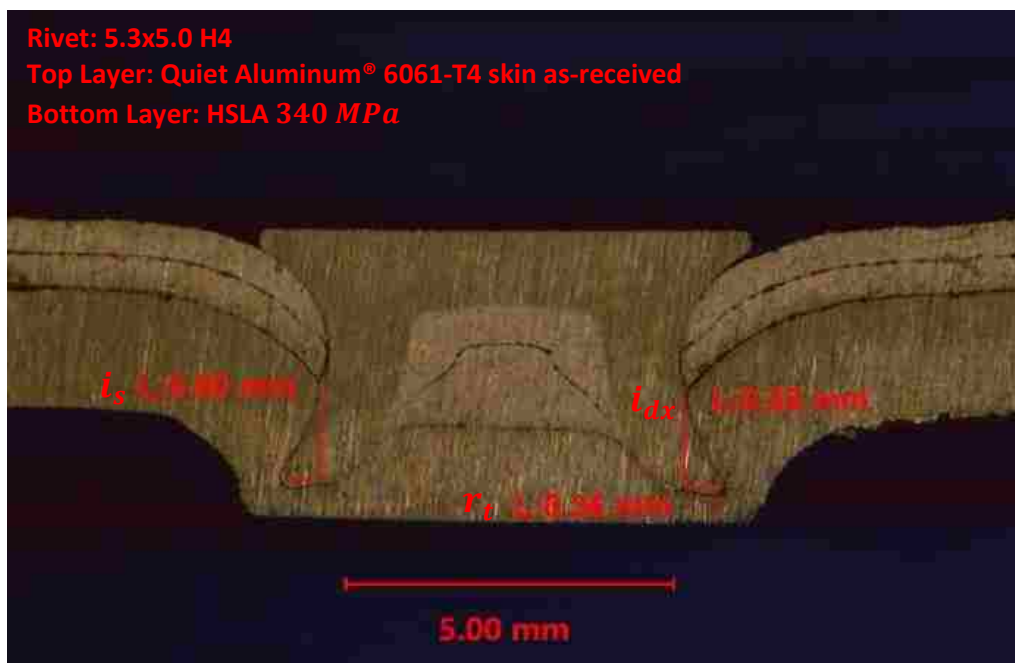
Microscope image on the cross section of the SPR joint with Quiet Aluminum® (6061-T4 skin as-received) and HSLA steel 340 MPa using flat die and 5.3x5.0 H4 rivet. The measurements in red indicate the inspected parameters of the joint, which showed proper interlocking and symmetry.
